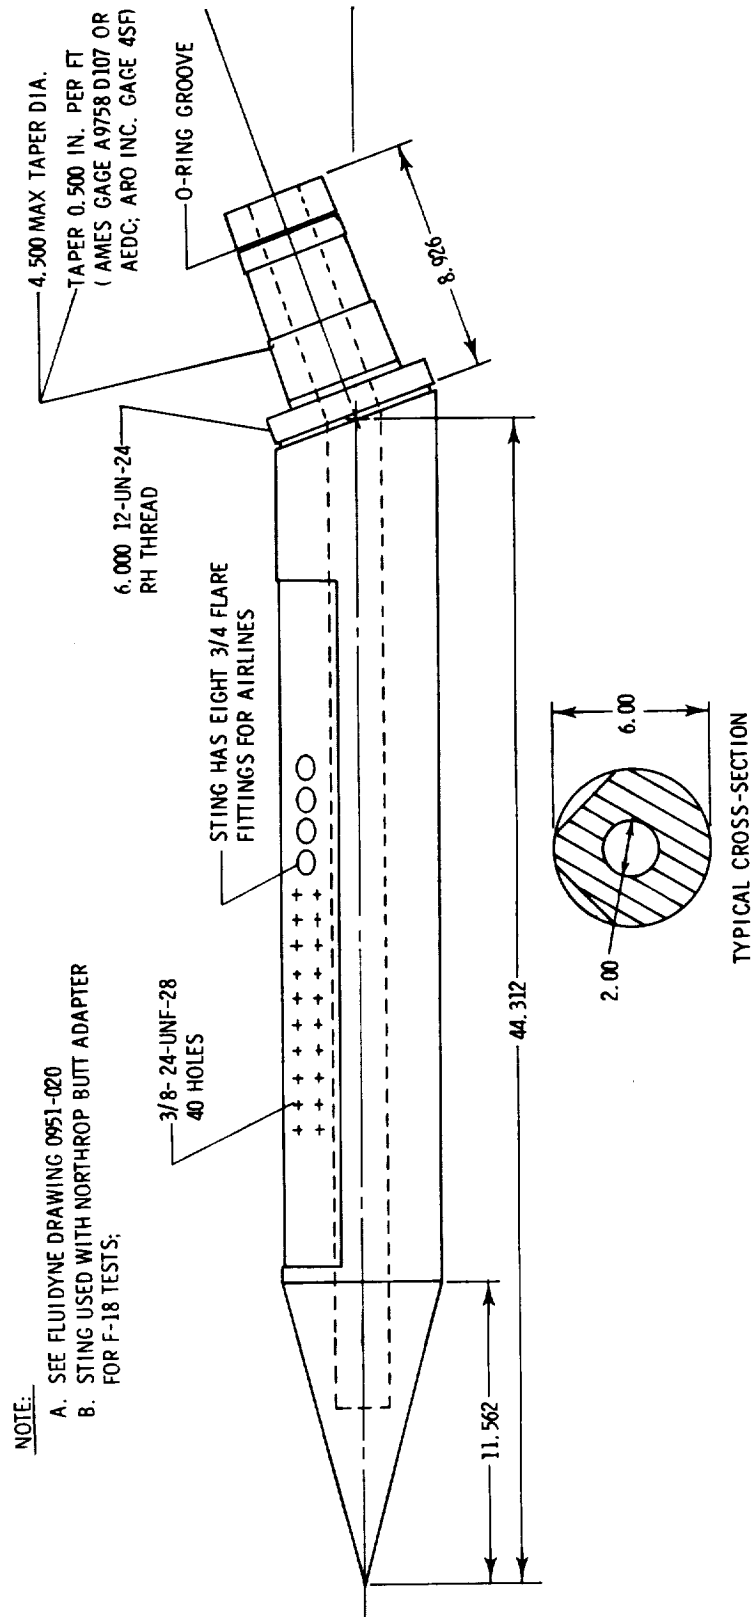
Sketch of Northrop air sting 0951-020. (All dimensions are in inches.)
